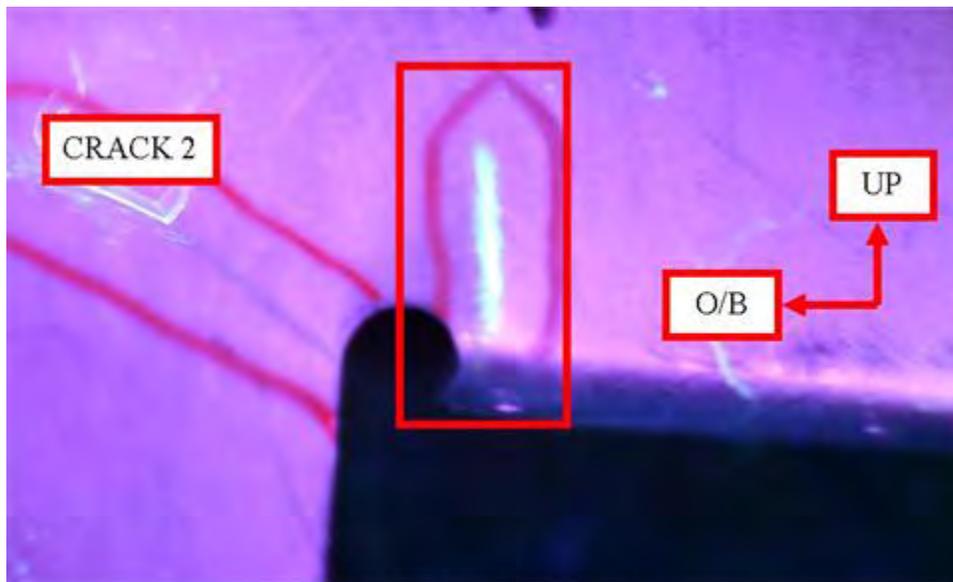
Microscopic View of Crack 1 on the Right Wing Bulkhead Wing Fillet
